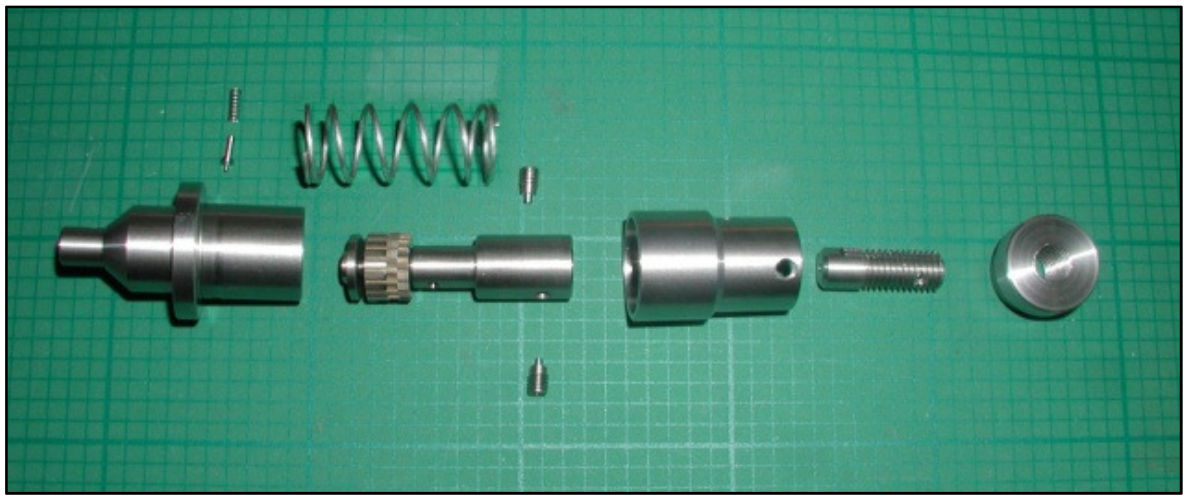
FABRICATED STAINLESS STEEL ACTUATOR (EXPLODED)
